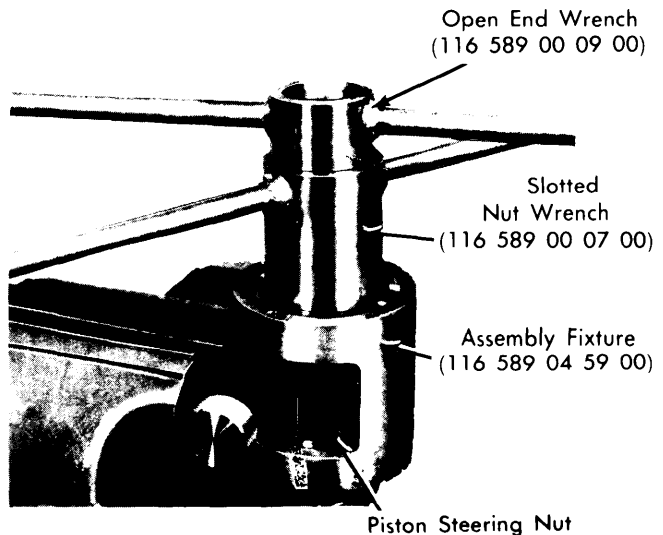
Removing Worm Gear Nut from Piston/Steering Nut
